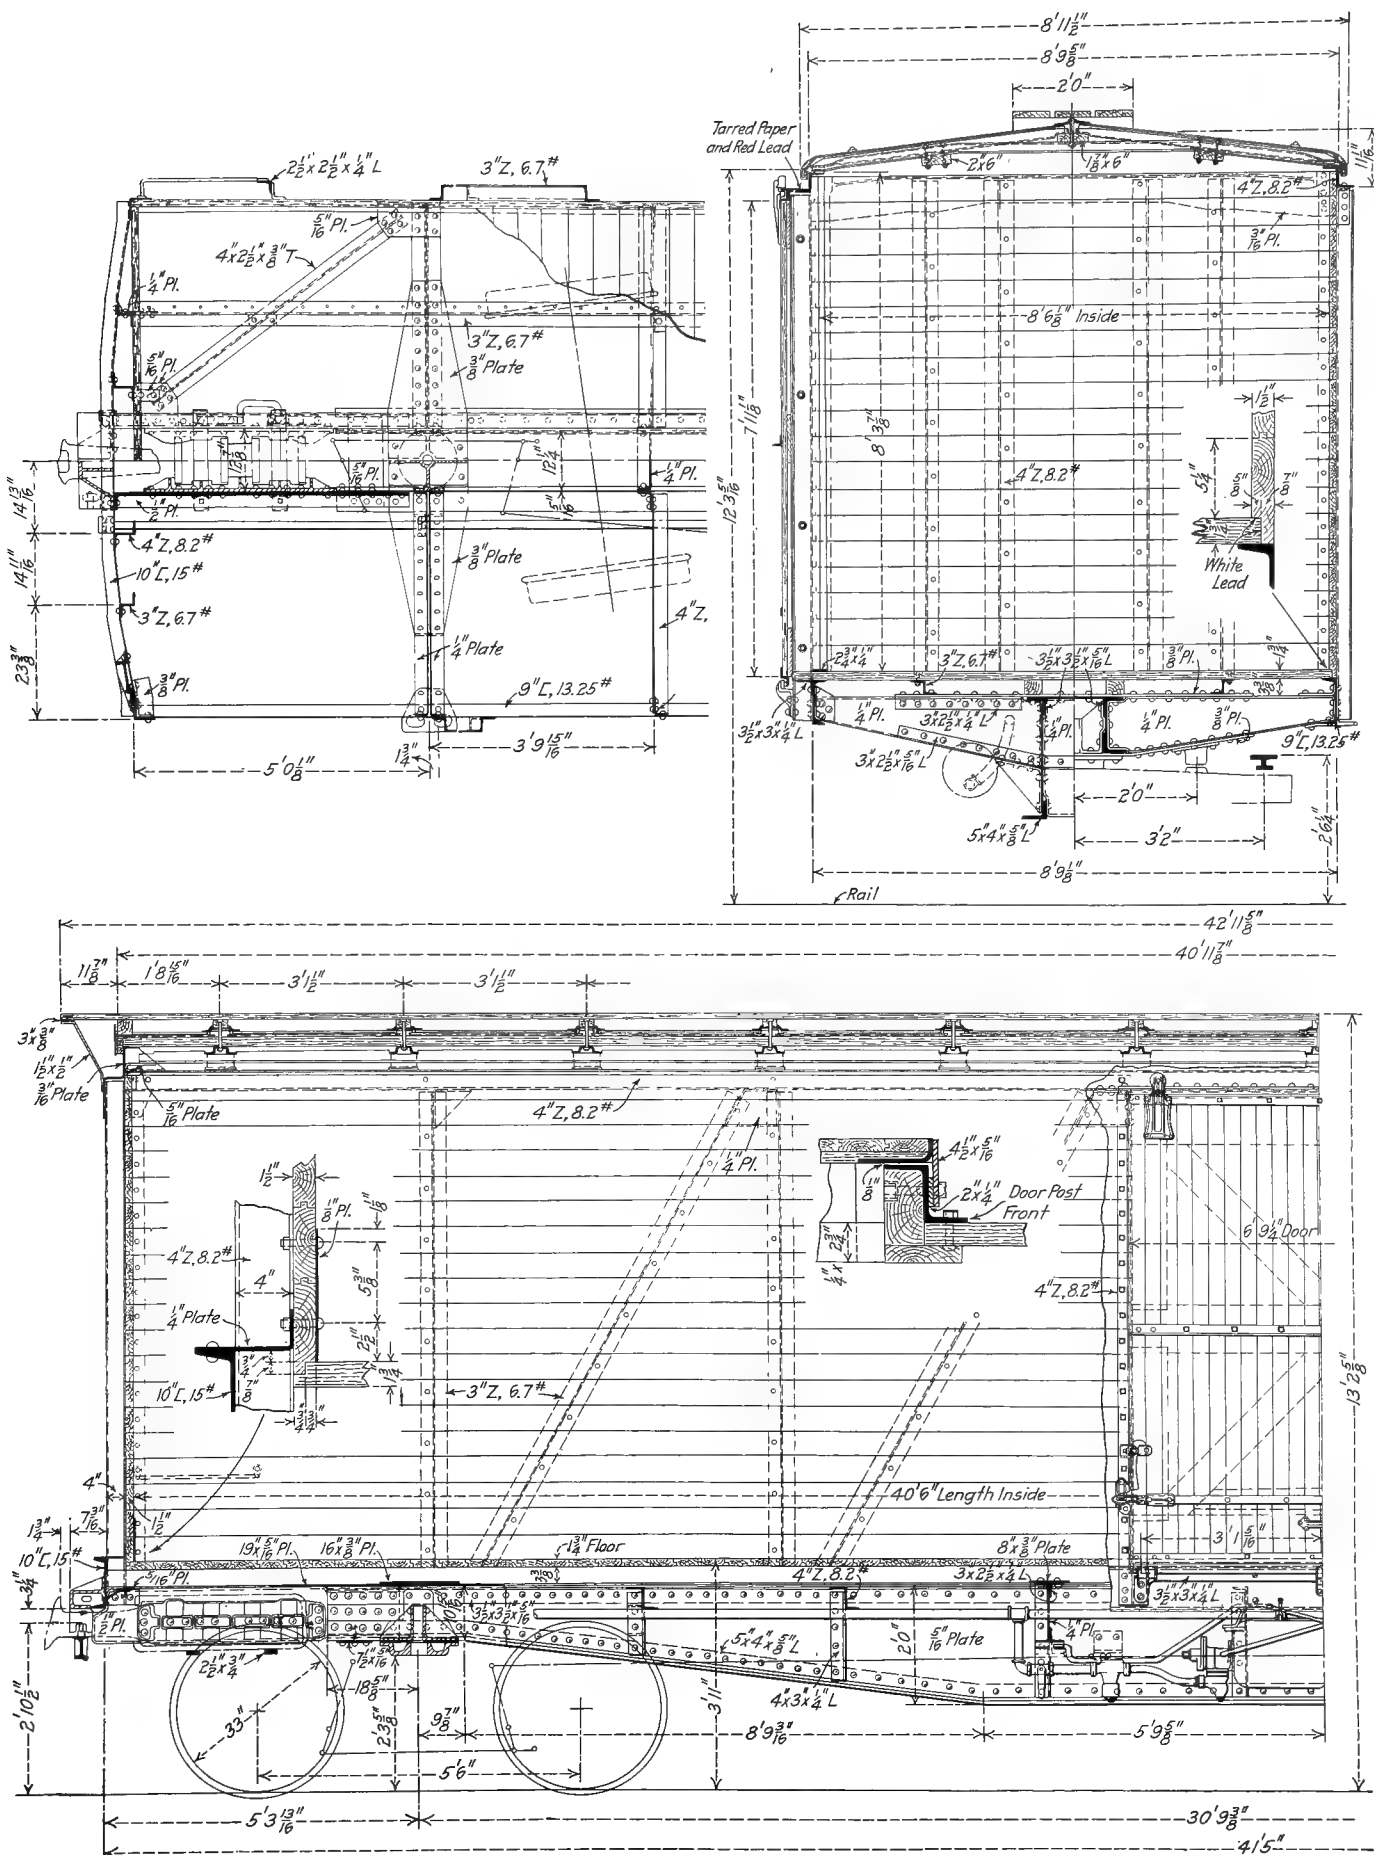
Illinois Central Steel Frame 40-Ton Capacity Box Car. Builder, American Car & Foundry Co.
